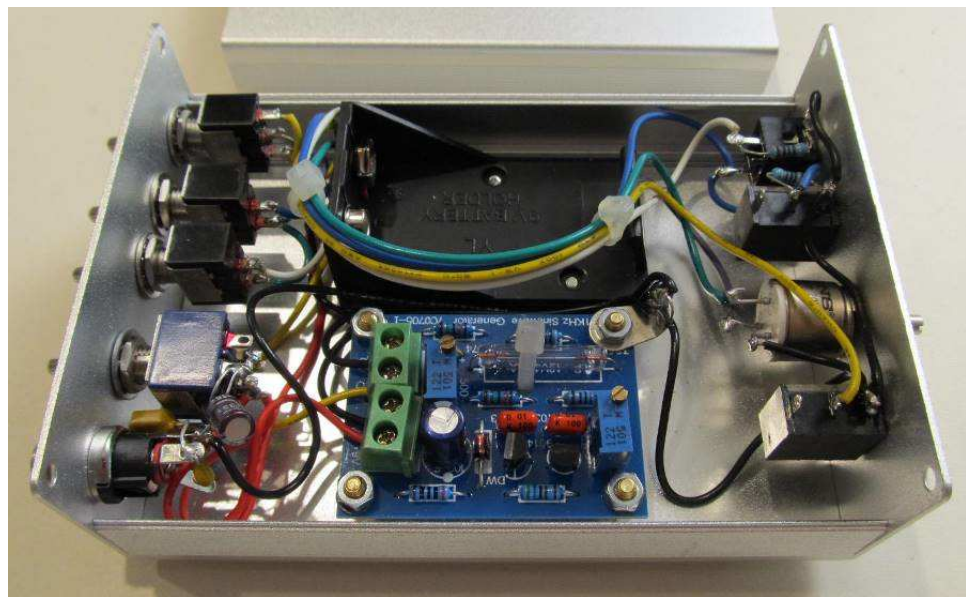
~ Interior view of completed Soundcard Setup Tester: The oscillator module is at lower-center and 9 V battery holder directly above. The ground lug is attached to the standoff in the upper-right corner of the oscillator PCB. Dimensions are 110 L x 80 W x 36.5 H mm.
